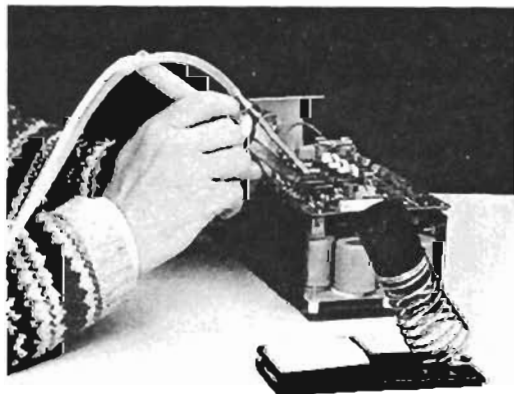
Soldering iron with fitted solder fume extractor (Hi-Tech UK)
